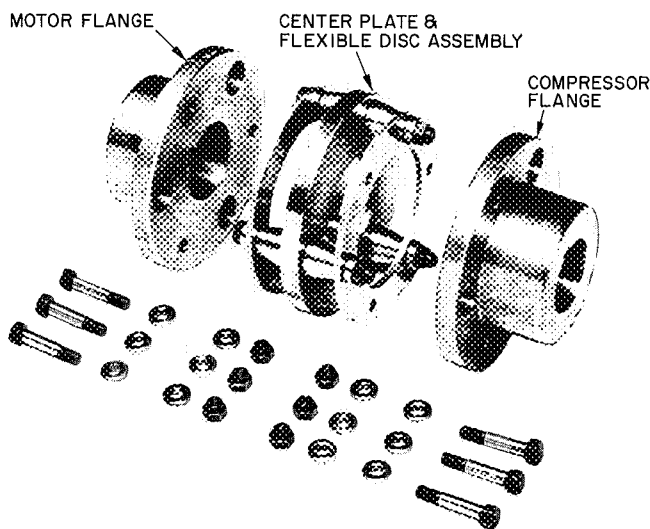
Dismantled Coupling Ready for Assembly to Compressor and Motor
